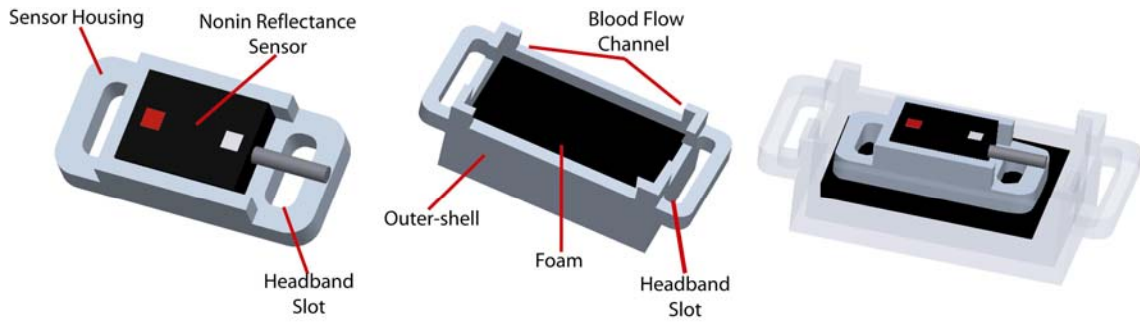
Housing 2 assembly. (a). sensor housing, (b). outer-shell, (c). assembled isolating housing.
